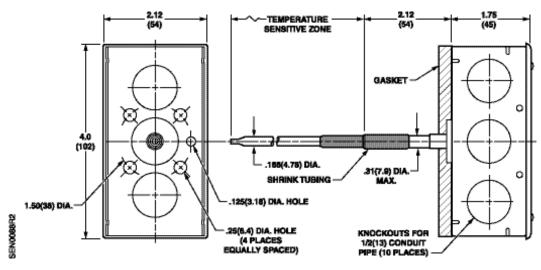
Mounting Hole Locations and Dimensions of Sensor Junction Box.
